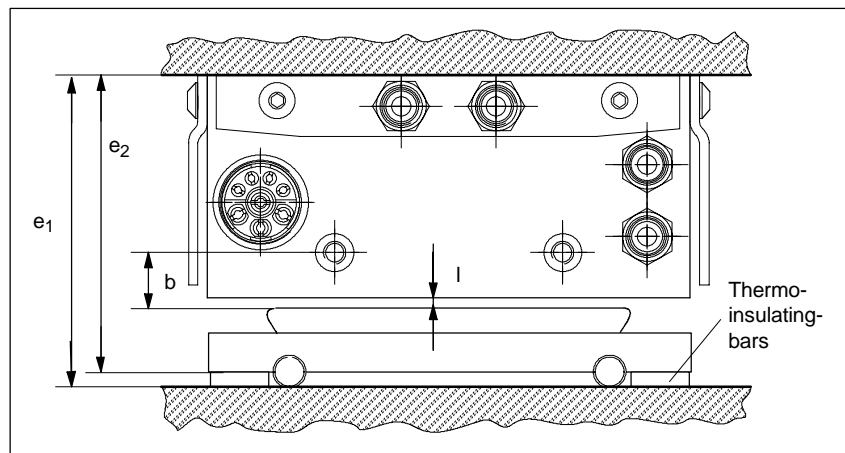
Check dimensions for motor installation illustrated by a 1FN1 motor
